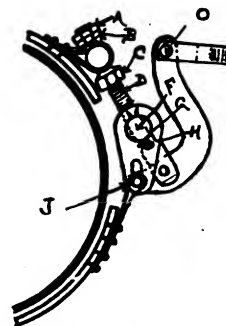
SHOWING THE ADJUSTING MECHANISM ON THE MODERN TYPE BRAKE
